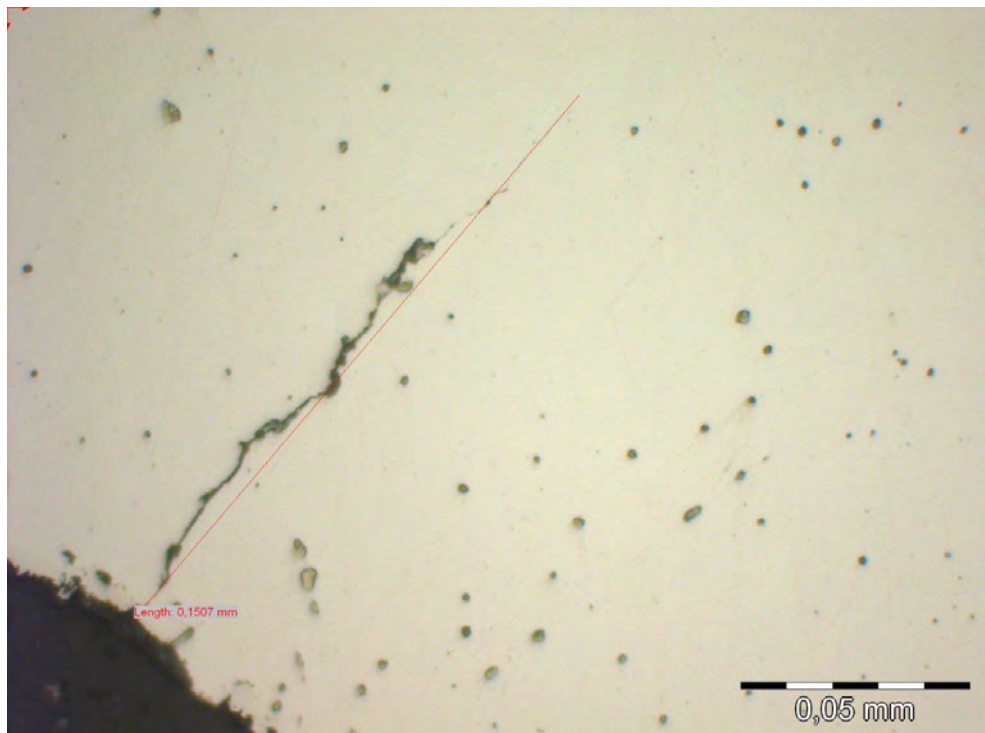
Cut six in crack at segment B, fourth ridge on barrel no. SFK 0120-A
